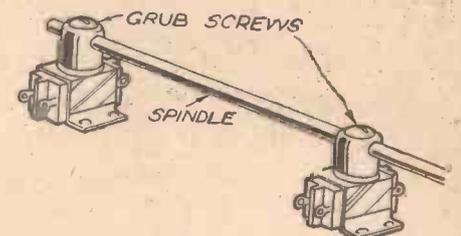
Baseboard-mounting Q.M.B. switches which can be ganged together and operated through a single spindle.
